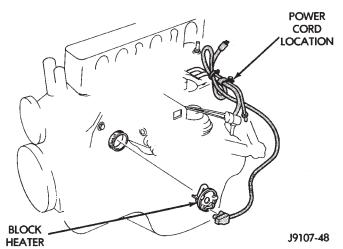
Heater and Cord— 2.5L 4-Cylinder Engine
